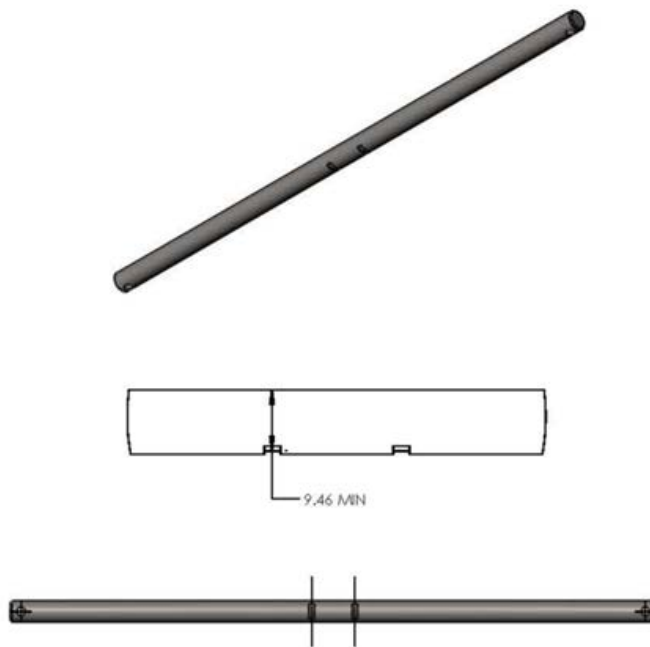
Wing Rod Step Tolerance Detail (dimensions in mm)
